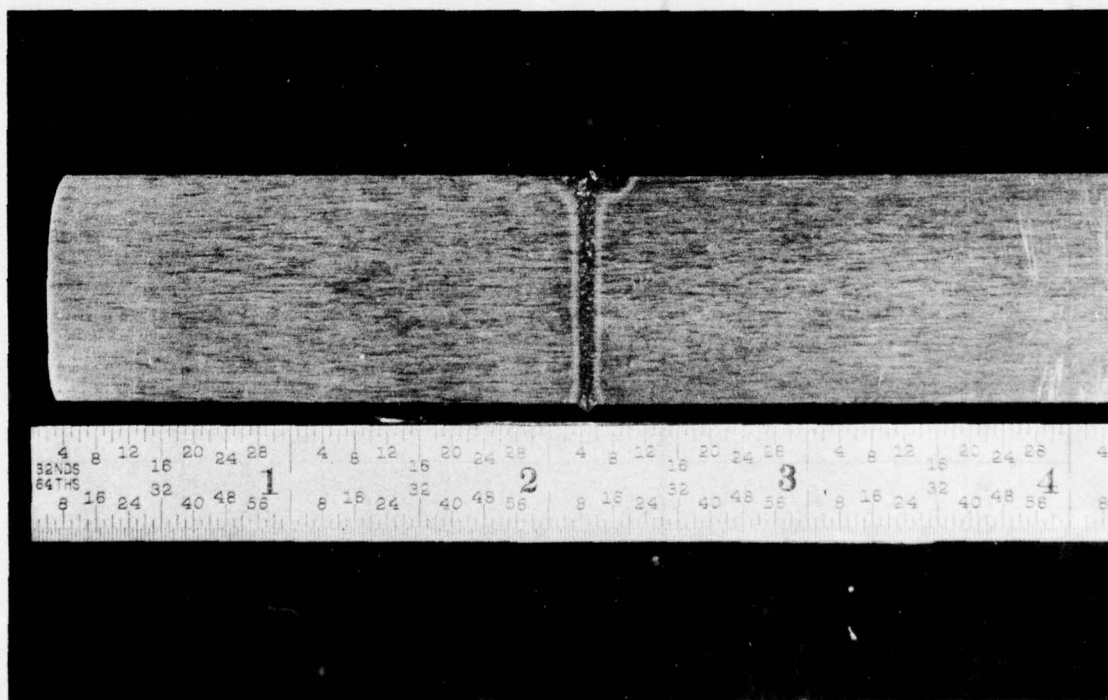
Macro-Section of Ti-6Al-4V Titanium Alloy Butt Weld (1.5 X MAG)
